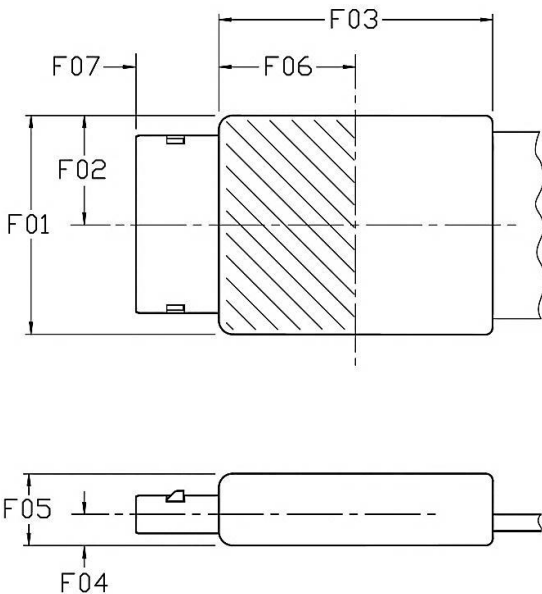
x4 Free Straight-out Internal Cable Form Factor
